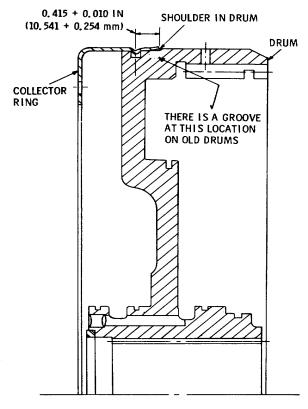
Assembly of Oil Collector Ring to Clutch Drum
